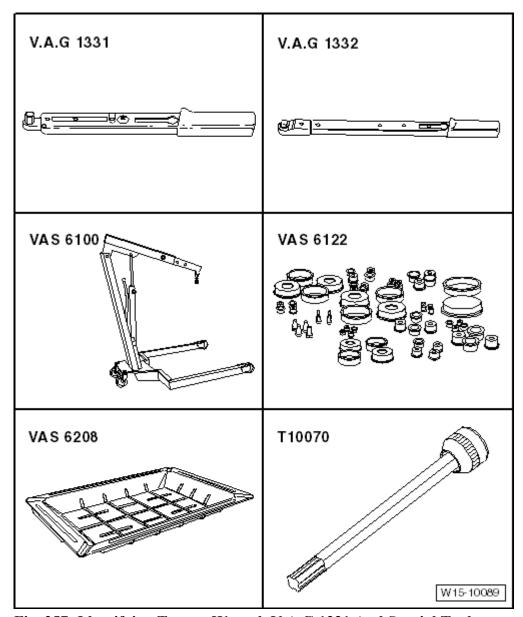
Identifying Torque Wrench V.A.G 1331 And Special Tools
